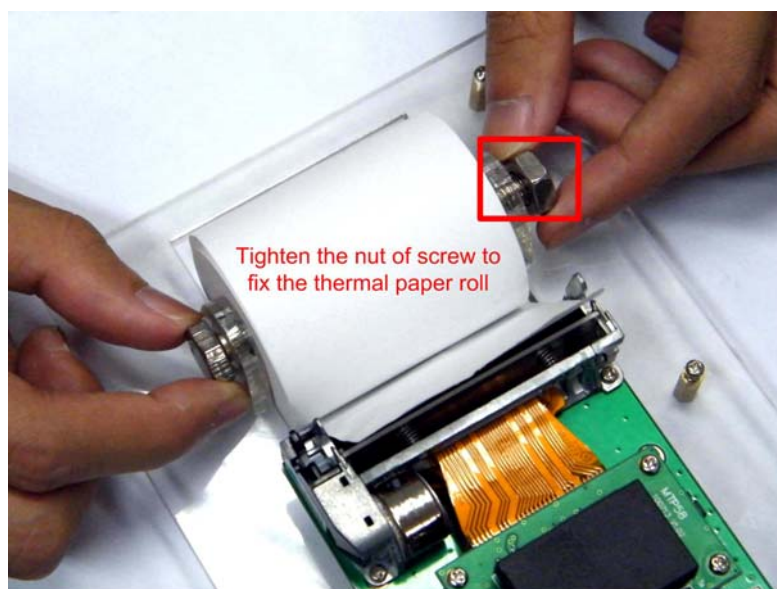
Tighten the nut of screw to fix the thermal paper roll
